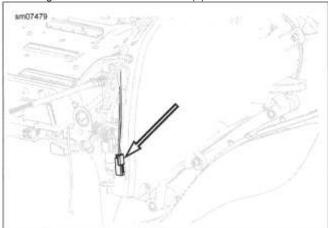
Front Fender Tip Lamp Connector INSTALL 78
